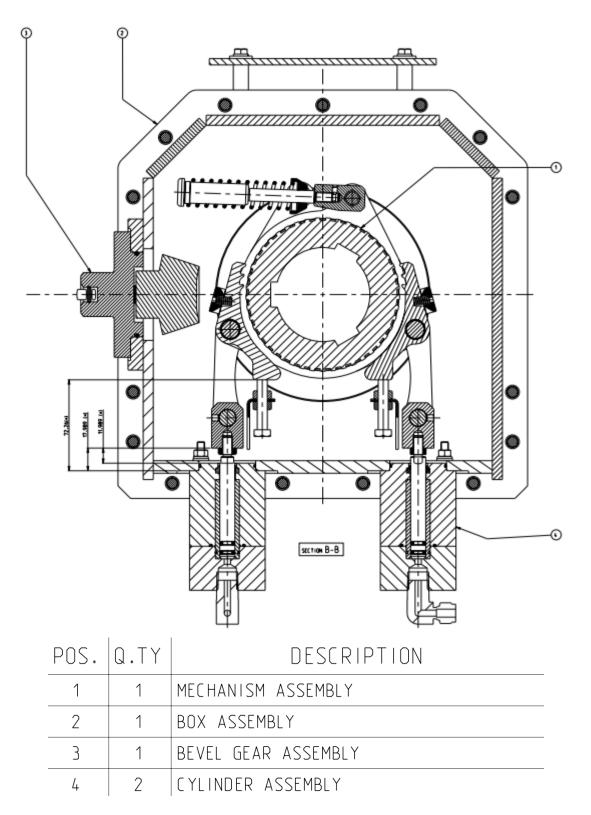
SM/H Box: step mechanism and hydraulic actuators
